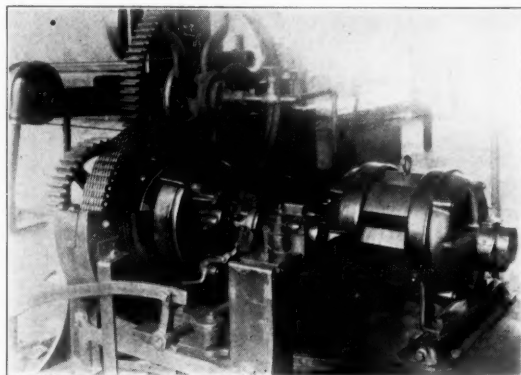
Showing a 5-roll Universal Textile Calender. The top, middle and bottom rolls are equipped with roller bearings, being oil lubricated as shown.
